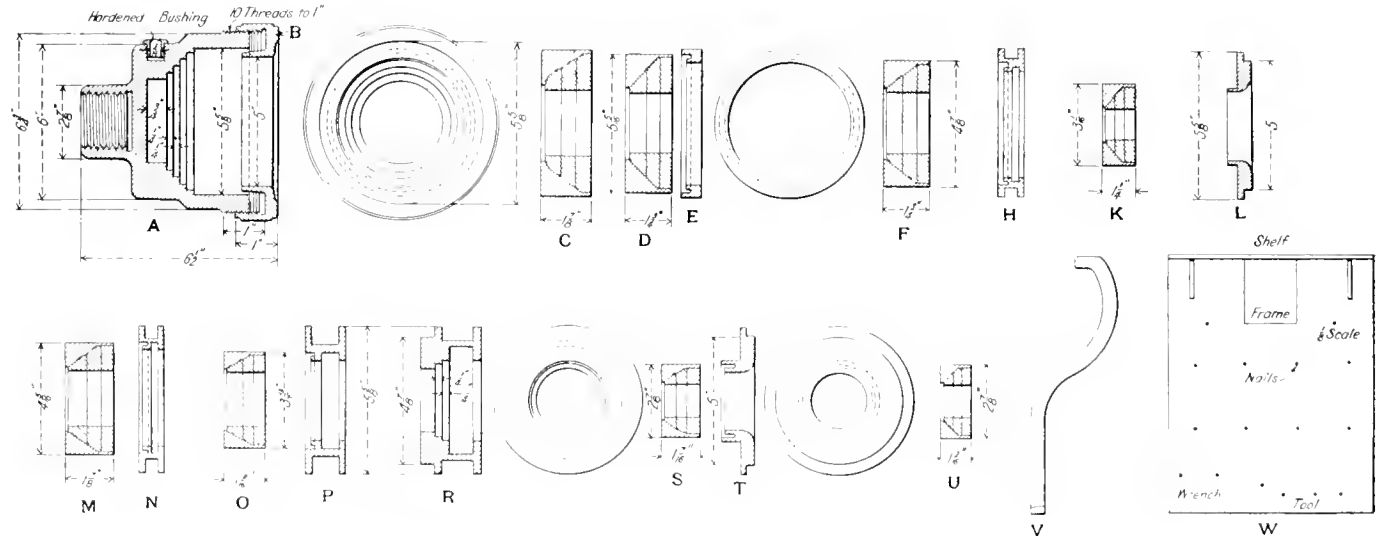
Chuck and Bushings for Boring Rod Packing.
